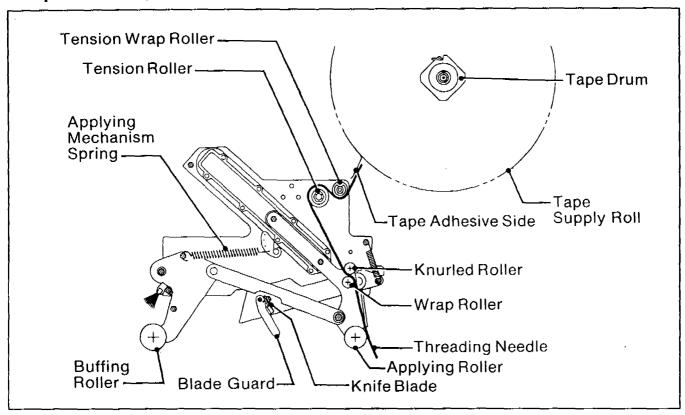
Tape Threading Diagram - Upper Taping Head - Left Side View
